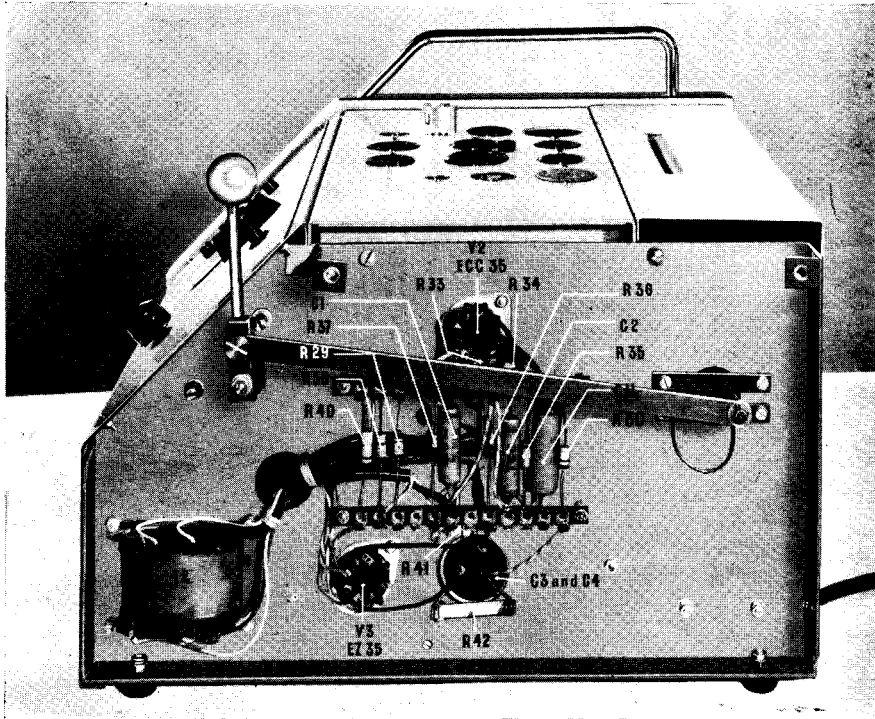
RIGHT-HAND SIDE OF CHASSIS SHOWING NUMBERED COMPONENTS.
